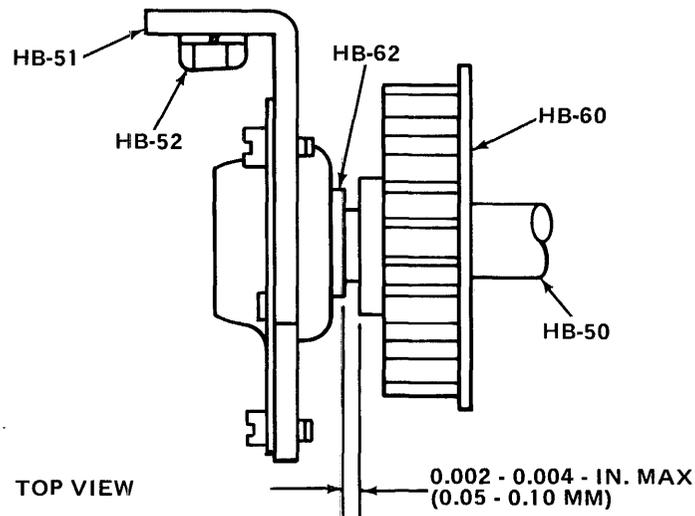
BUSHING END-PLAY ADJUSTMENT FOR PRELOAD CLUTCH SHAFT (HB-50)
